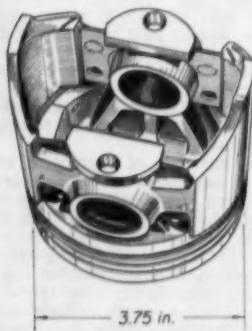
Piston for Automotive Engine Produced as a Permanent Mold Casting to Casting Dimensions Closer than Can Be Obtained in Sand Casting
